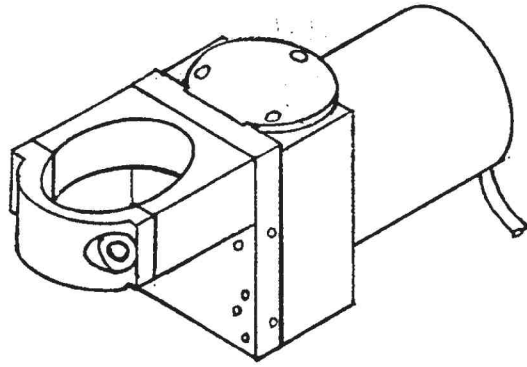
AVC-5 COMPACT DRIVE ASSEMBLY
